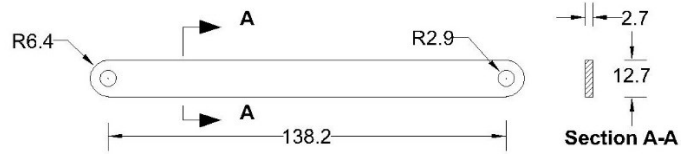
Details of Sidebars (all dimensions are in mm, steel plate gauge 12).
